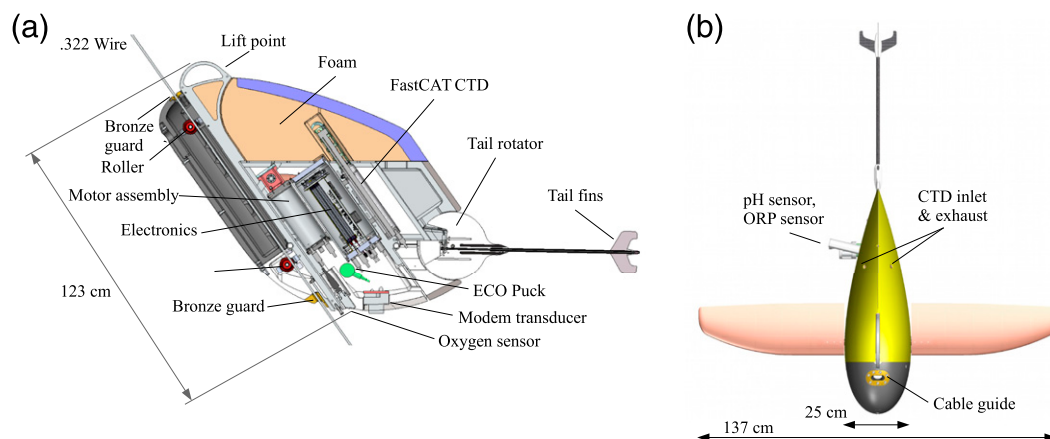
Computer-aided design (CAD) images of Wire Flyer. (a) Side view section showing the arrangement of the internal parts. (b) Top view, along the direction of the cable, showing the body cross-sectional shape and wing plan.
